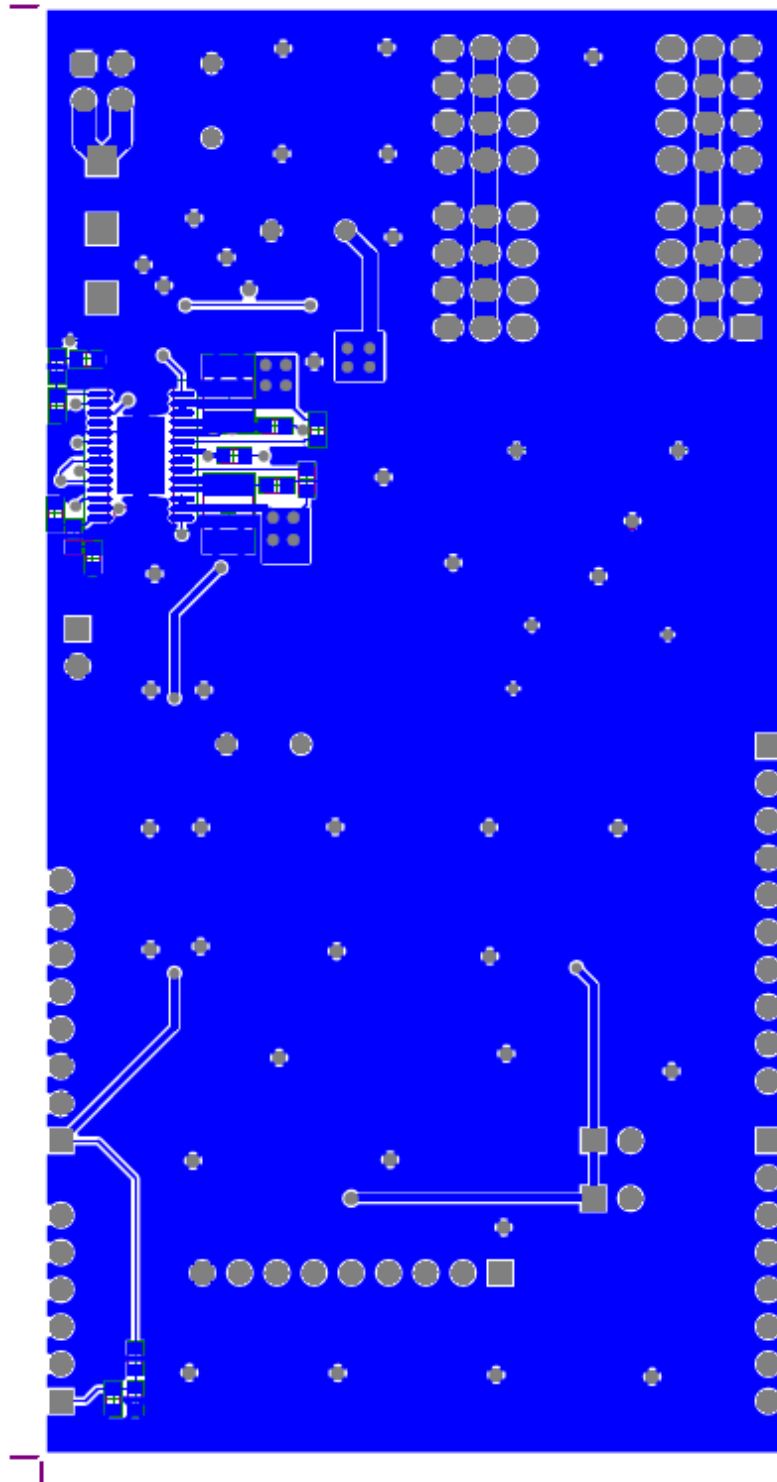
Prototype Rover Shield PCB - Bottom Copper Layout
